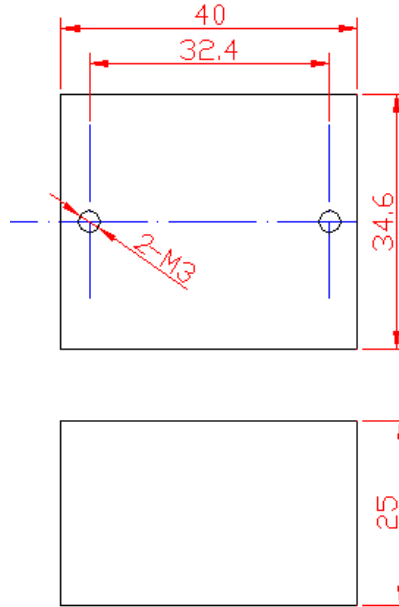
Mechanical Dimension of SPM55 Heat Sink
